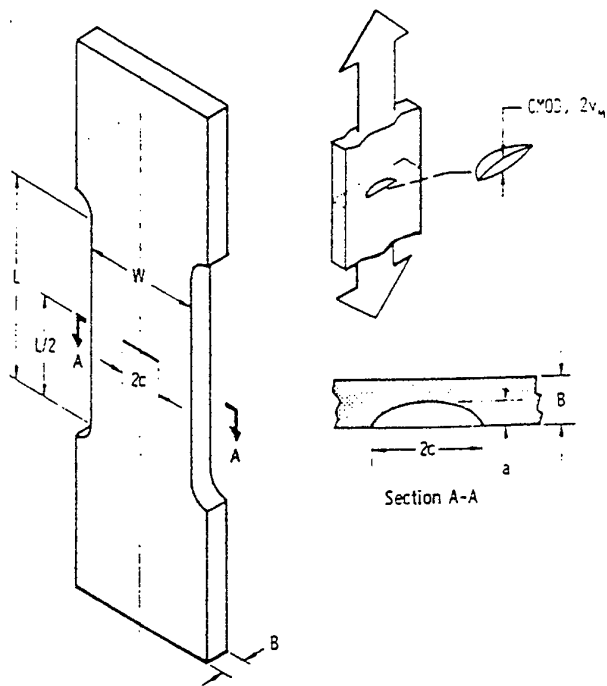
Typical Surface-Crack Specimen (Grip Details Omitted) and Nomenclature
